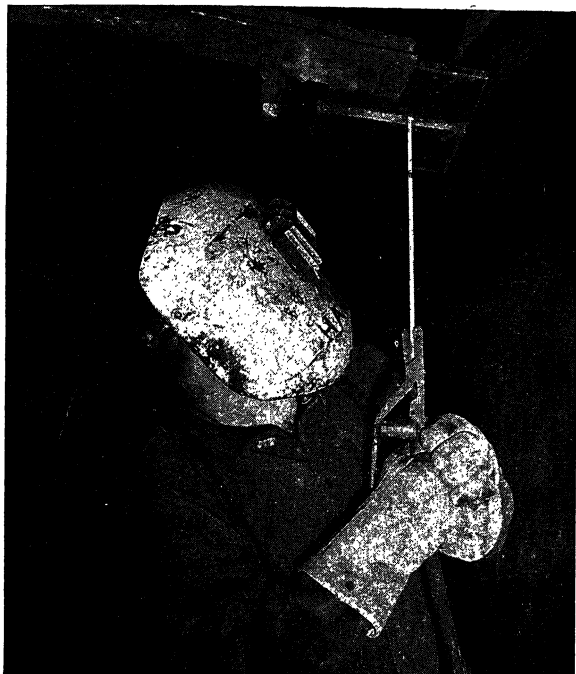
Making the overhead butt weld. Welding from left to right.
